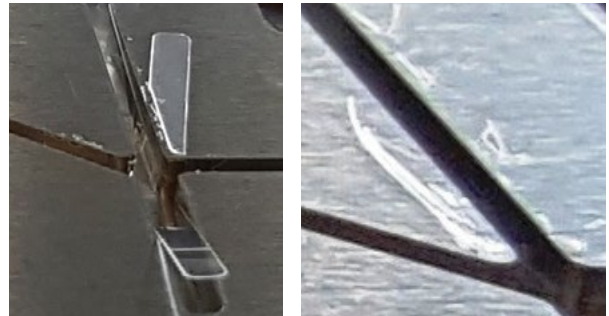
Fig C –Control Adhesive Build-Up on Stamping Tool after 700 cycles
